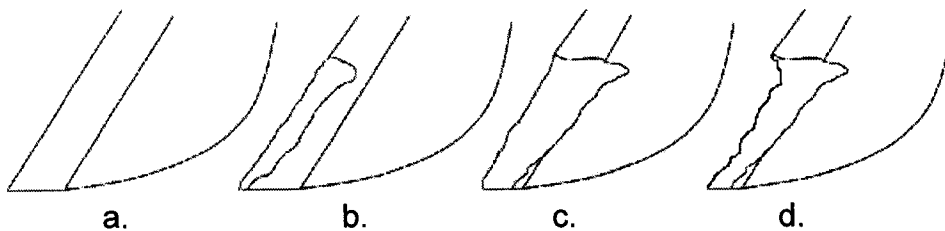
Tool Wear Looking at the flank face: a) New Tool, b) Flank wear, c) Worn tool, d) worn tool w/ chipping
